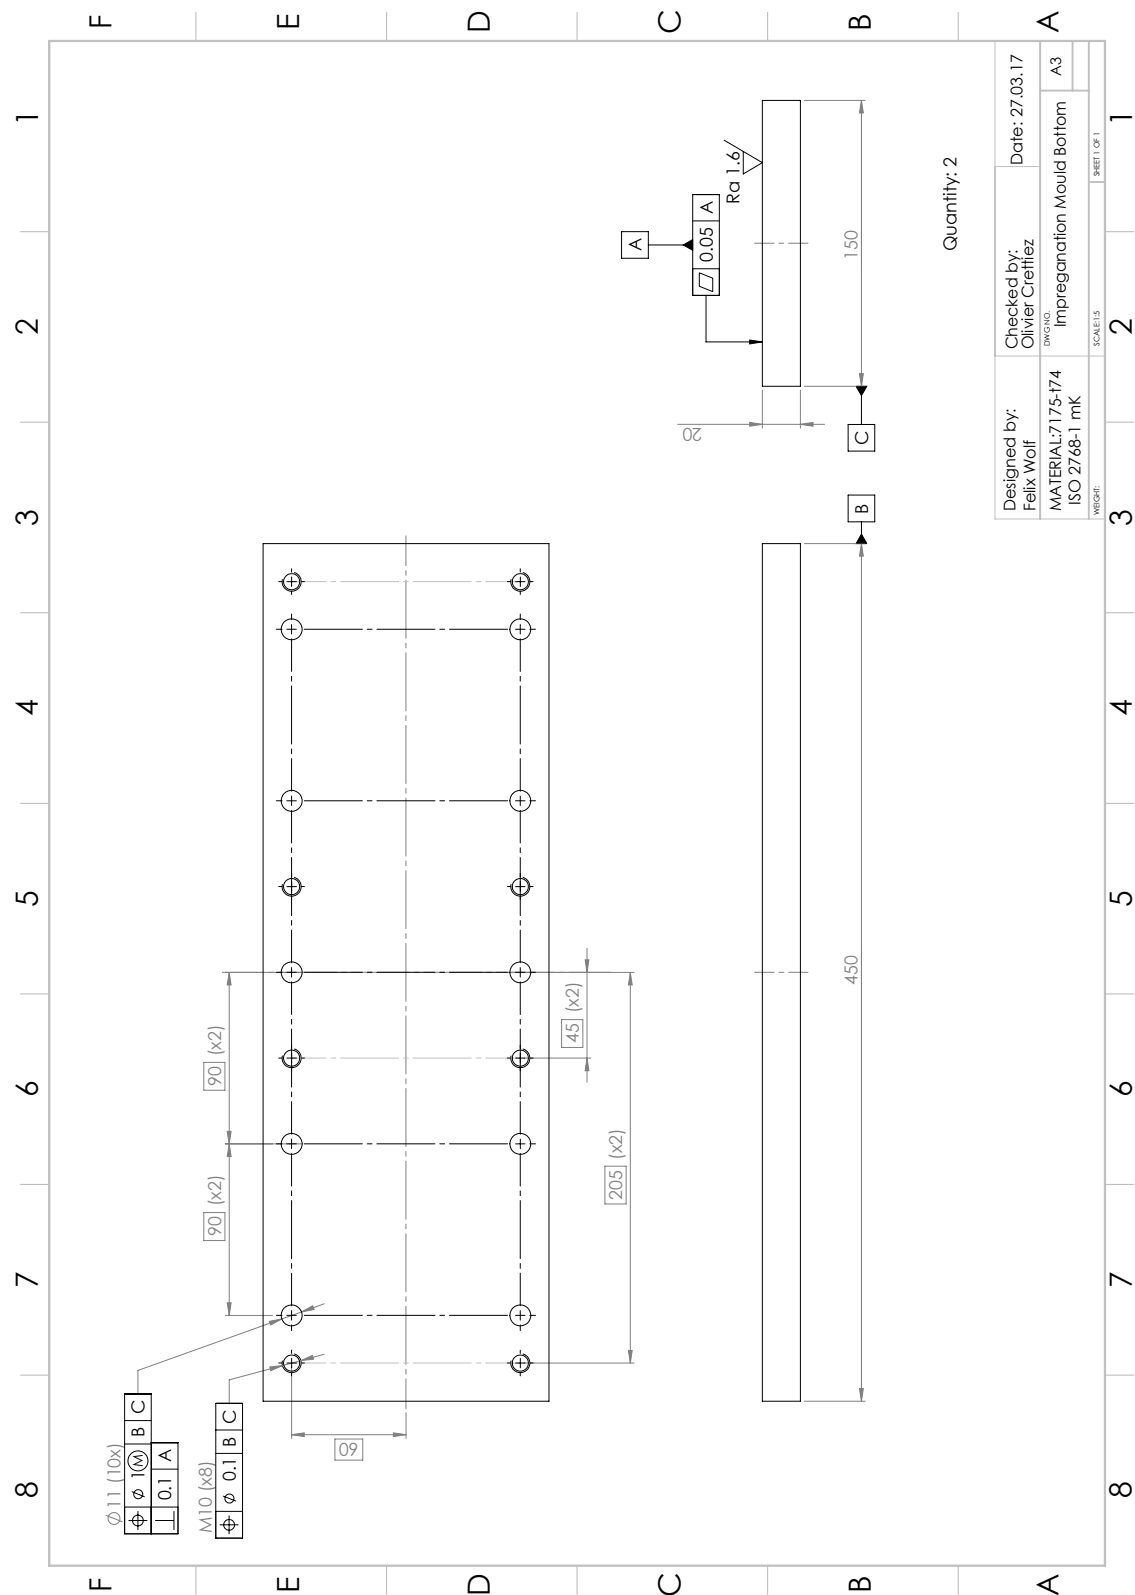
Manufacturing drawing of the bottom part of the impregnation mould.
